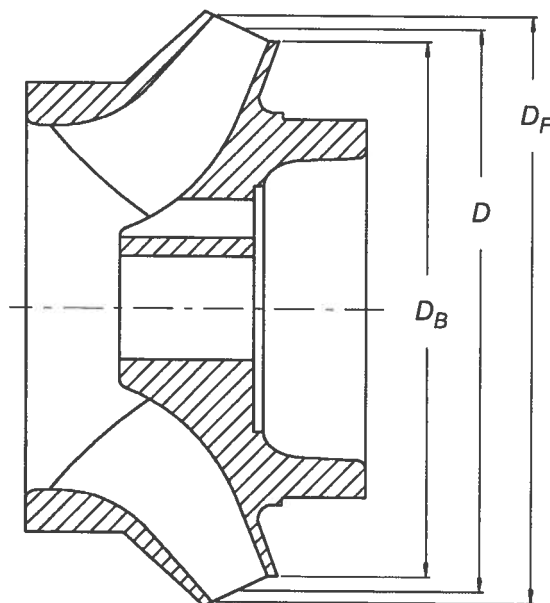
Impeller with angled outside diameter
